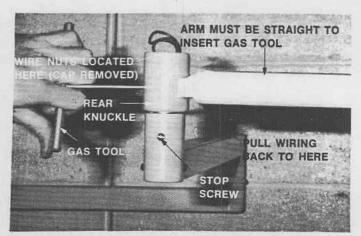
RELEASING PRESSURE ON GAS SPRING
